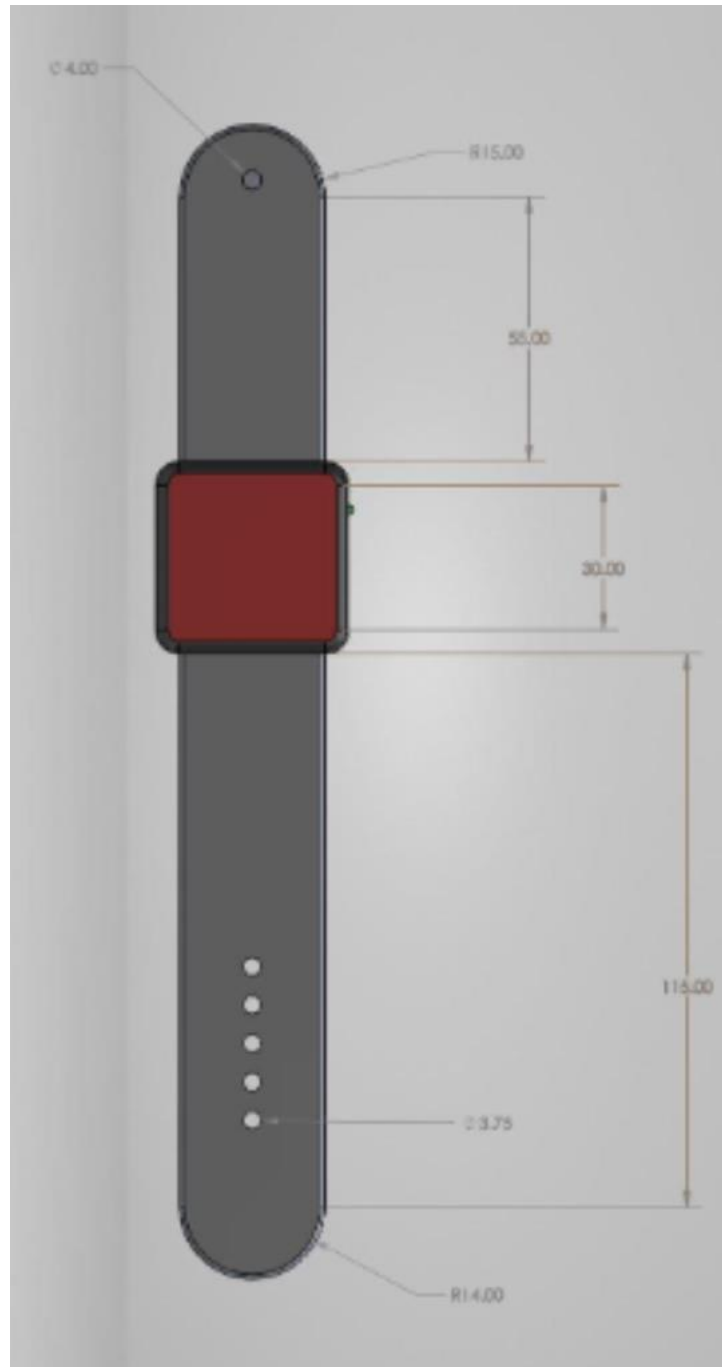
Top View of Proposed Final Design Drawings (All measurements in mm)
